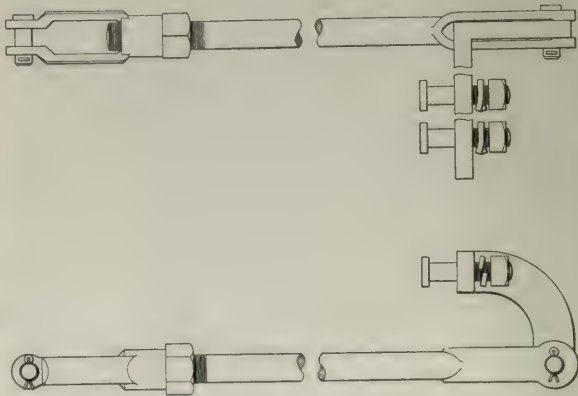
Showing Method of Adjusting Hall Style "G" Switch Box.
